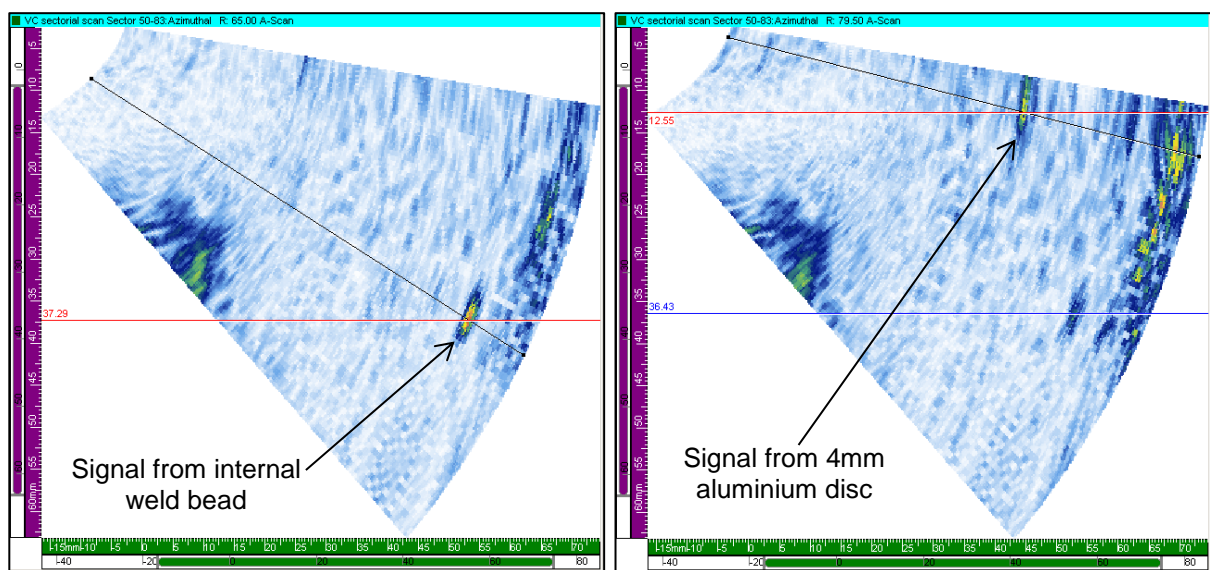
B-scan images of butt fusion welds in 355mm PE pipes: unflawed weld (left), and weld containing a 4mm aluminium disc (right).
